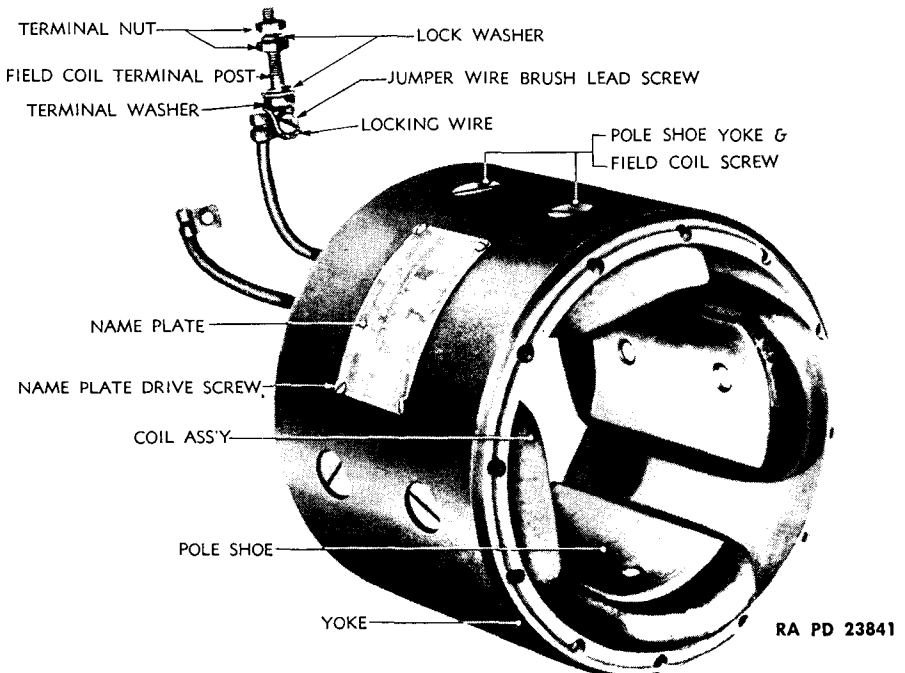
Yoke W/Field Coil Assembly—Eclipse Generator, Model 31, Type 314
